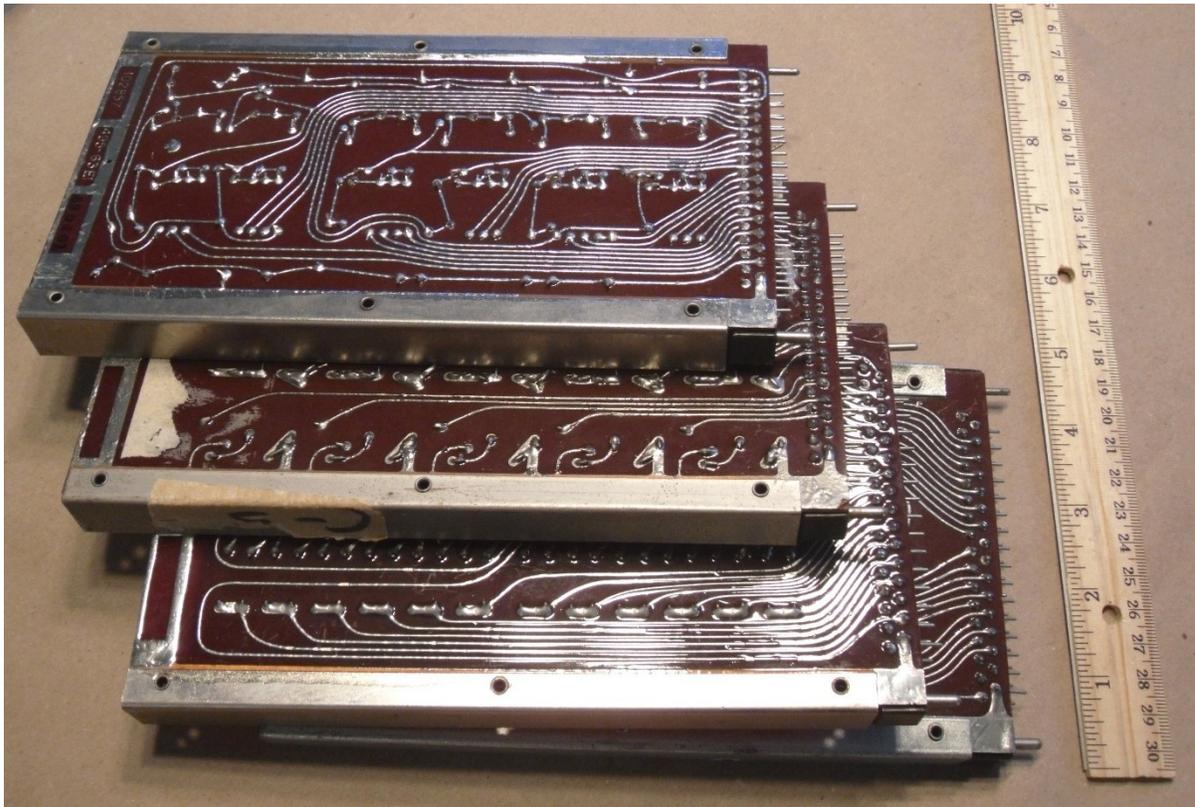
Mark opines that the UT inspector stamp may mean Utica. Lowell would guess that UT could be UniType, the UNIVAC variation of a 5-bit interface teletype machine.
